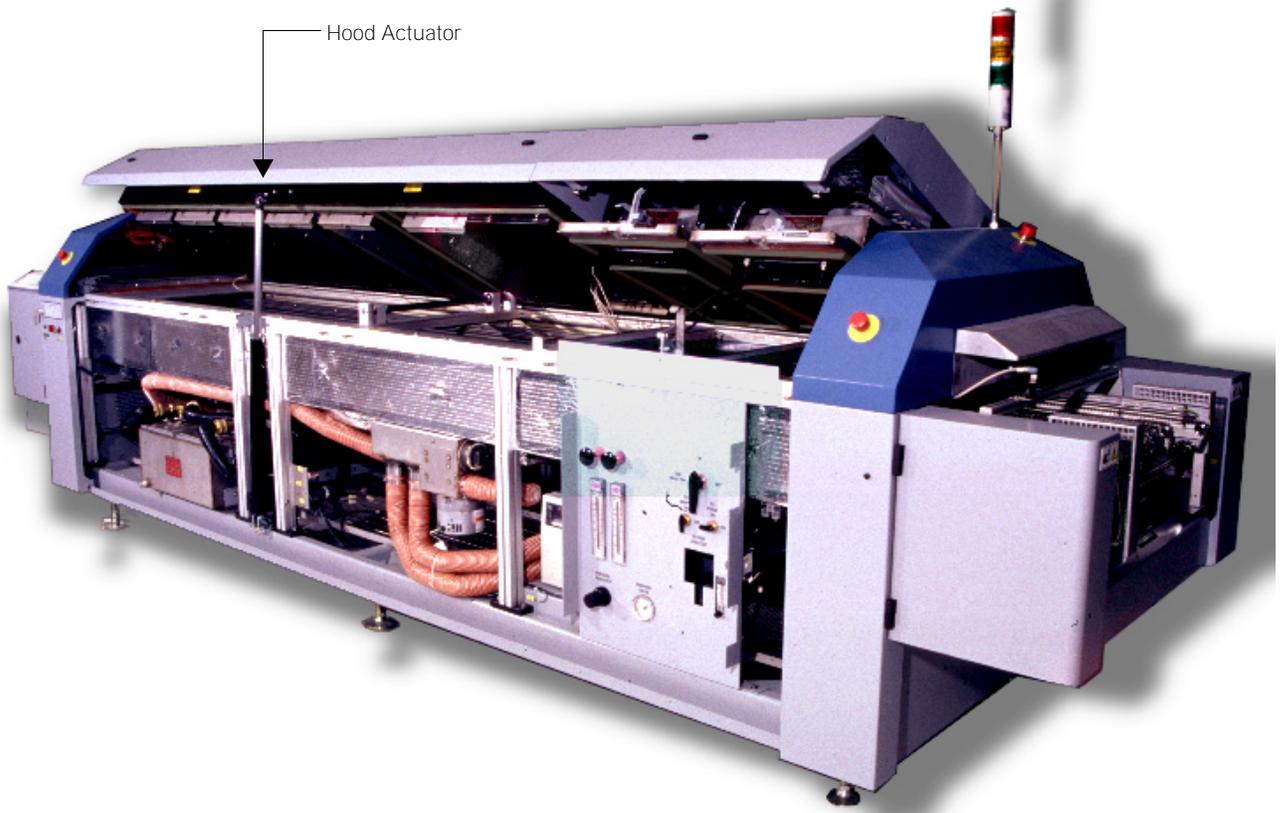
Machine Front — Panels Removed; Hood Open (OmniFlo™-7 Depicted)
